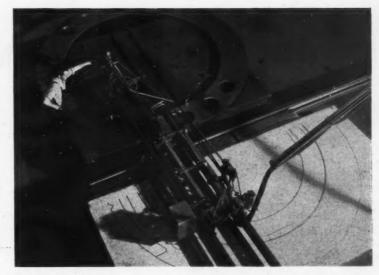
Hancomatic flame-cutting machine set-up for operations on a stator ring. The machine automatically follows the drawing seen in the foreground
